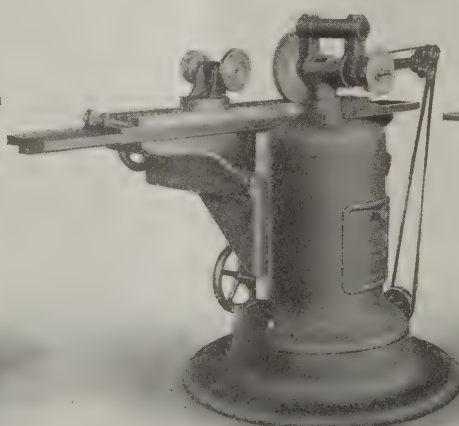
Table Reversed and Head in Place for Face Grinding.
